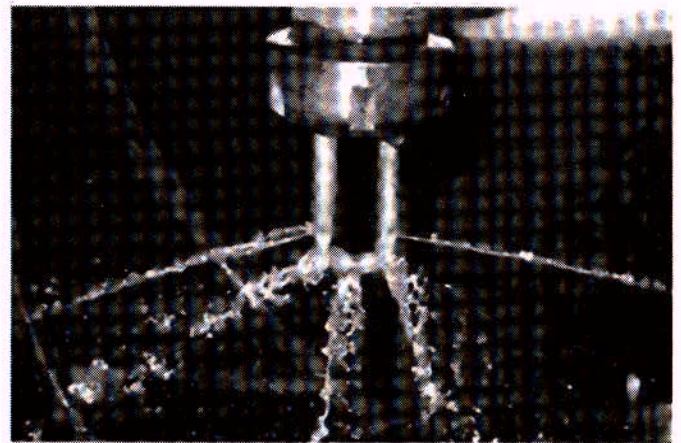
Flushing of U-tube Cu electrode in die sinking EDM
